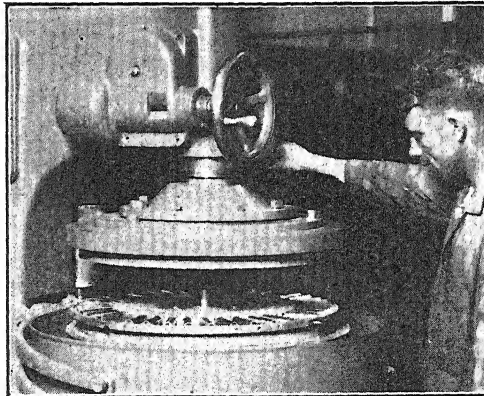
The Norton Co. Type-50 Crankshaft Lapping Machine Suitable for Lapping All Crankpins and Bearings in One Operation.
